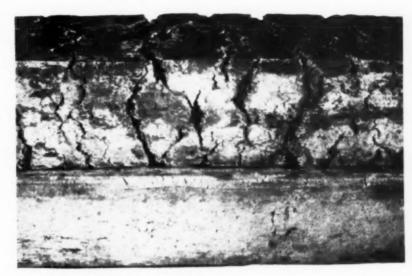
Two 5-In. Billets of High-Copper Stainless Steel ("Carpenter 20"), the Top One Extremely Hot Short and Worthless, the Bottom One With Endurable Corner Cracks Which Can Be Machined or Ground Out
